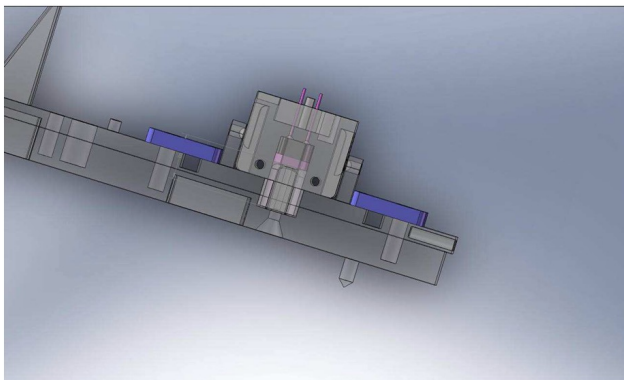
Partial view of a SMRD scintillator counter endcap with the optical connector housing a MPPC and a mini PCB.
